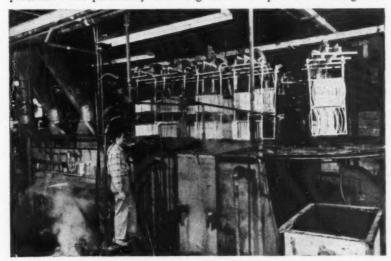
Part of automatic plant installed at Light Metal Processors Inc. showing work being removed from dye tanks (Courtesy of Product Finishing)
